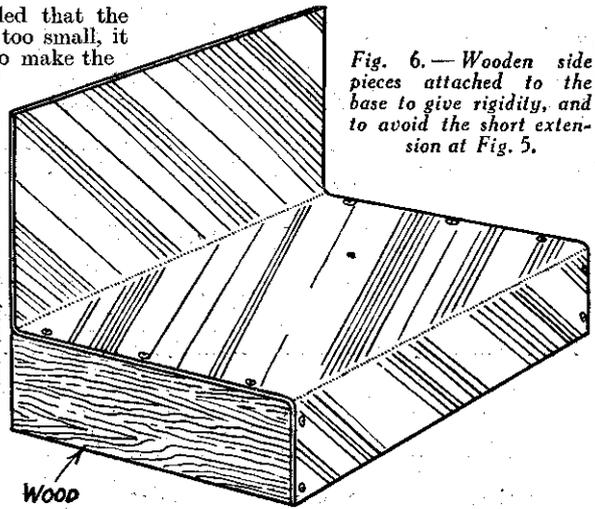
Wooden side pieces attached to the base to give rigidity, and to avoid the short extension at Fig. 5.
